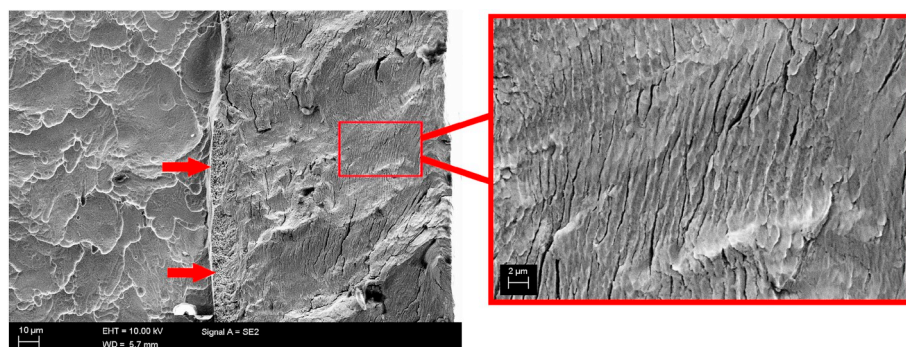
Detailed SEM imaging of the weld fracture surfaces along the shear part; a GE2 specimen's weld fracture surface near the weld corner ($S \approx 3$ – 4 mm). The red arrows are showing brittle failure at the full depth (root) of weld inside the specimen (between the two halves).
